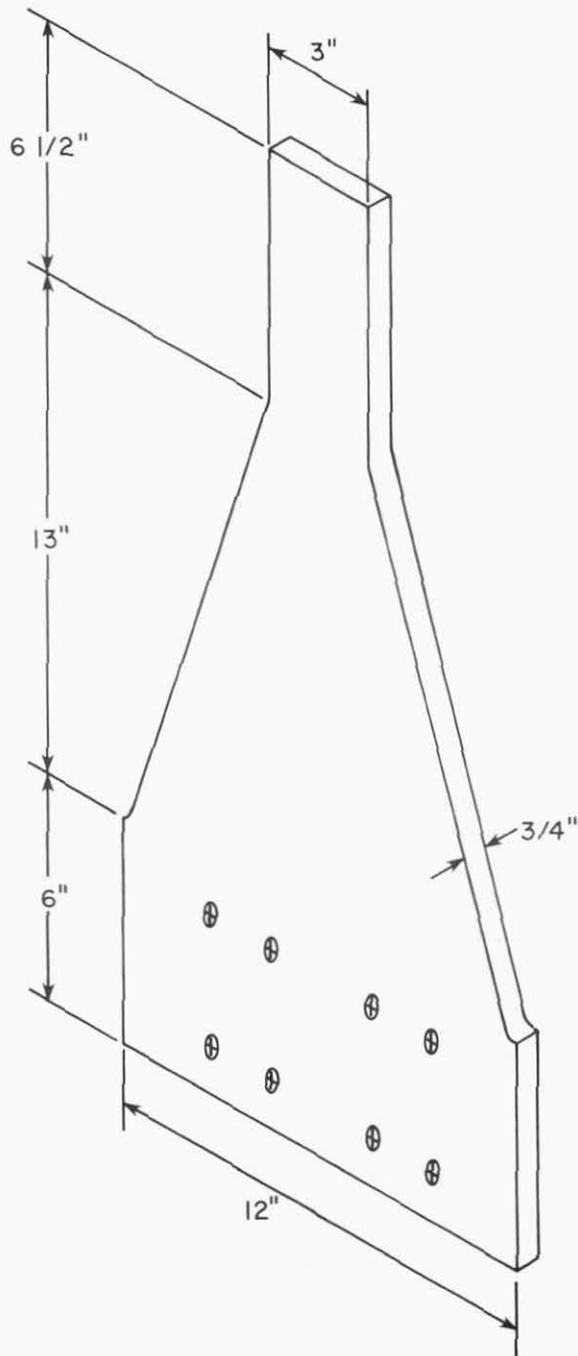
Dimensions of Cantilever Device for Shaking Table Tests
